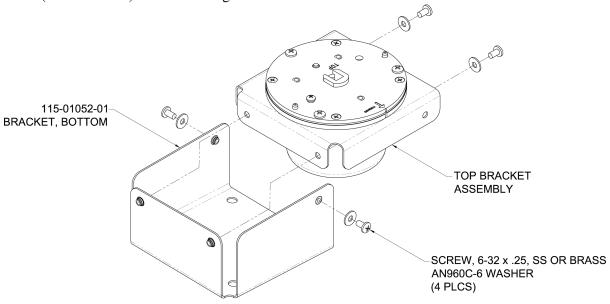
Lancair IV/IV-P GMU 44 Mounting Bracket
